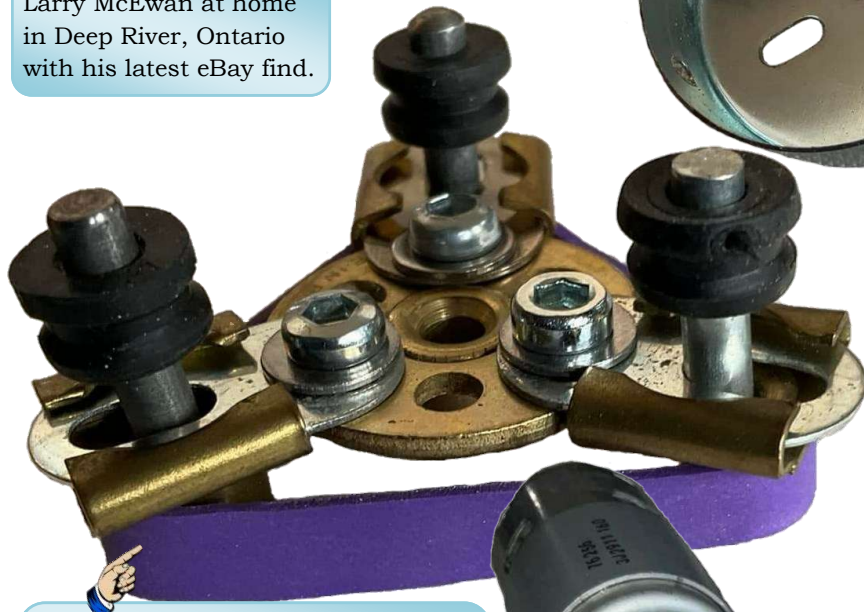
The motor drive side made from a small Bush Wheel, 3 Fishplates, 3 Slide Pieces, 3 x 1" Rods and 3 x part 23c Rubber Pulleys.
